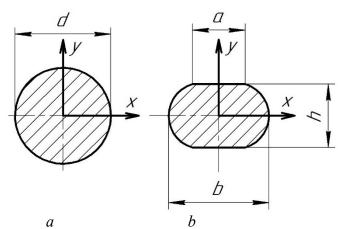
Cross-sections of bar stocks: a – round section; b – barrel-shaped section.
